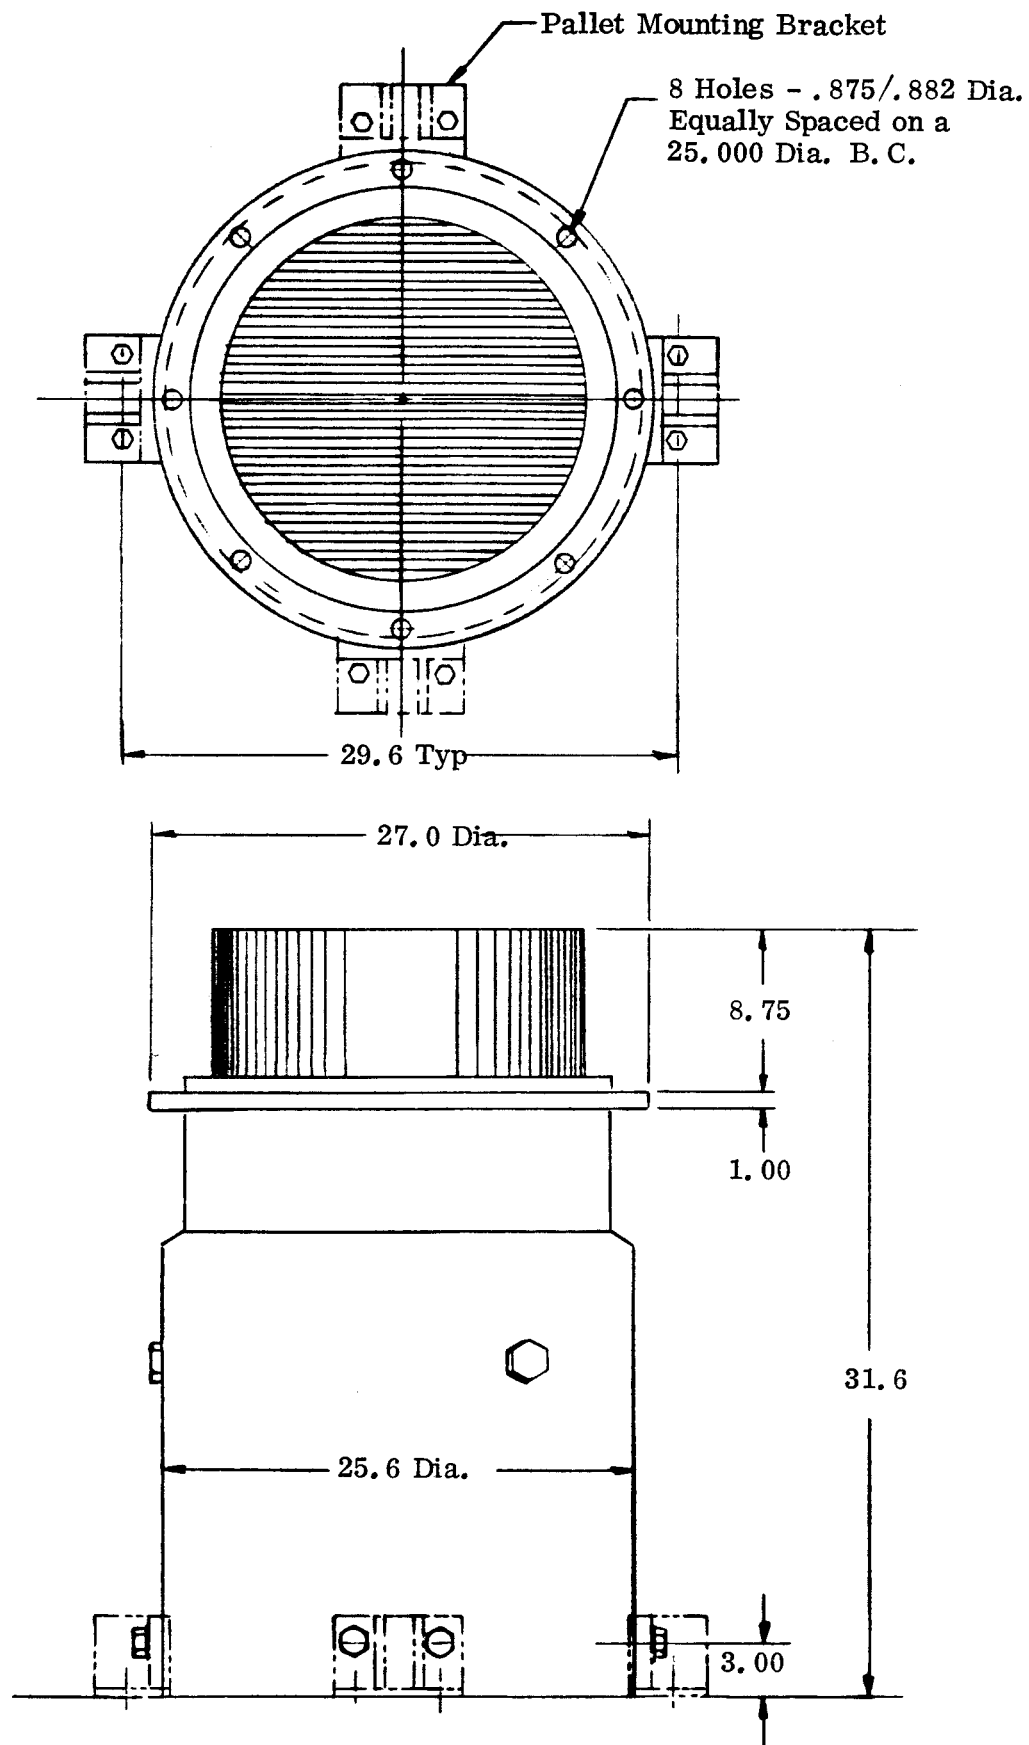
SENTINEL 25E EXTERNAL DIMENSIONS (IN INCHES)
